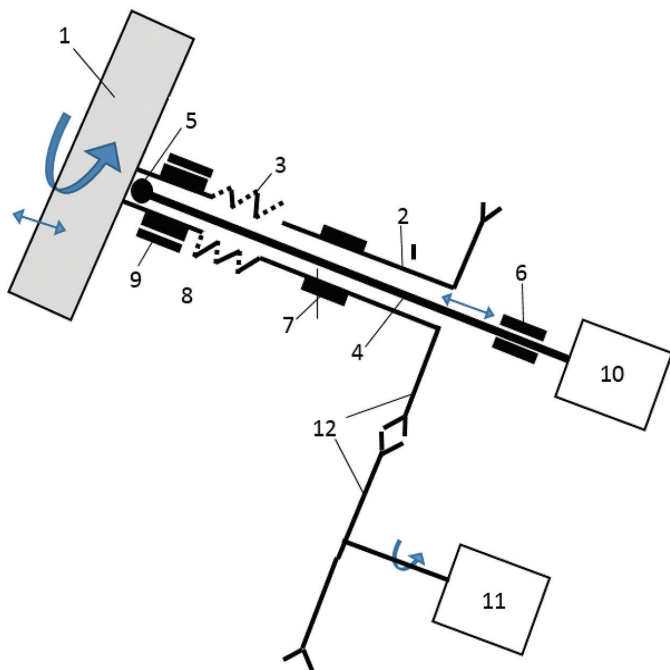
Vibrating disc granulator; explanations: 1 – turn disc, 2 – hollow shaft, 3 – elastic element, 4 – stiff rod, 5 – follower, 6, 9 – sliding bearings, 7, 8 – rolling bearings, 10 – electric vibrator, 11 – electric motor, 12 – belt transmission
